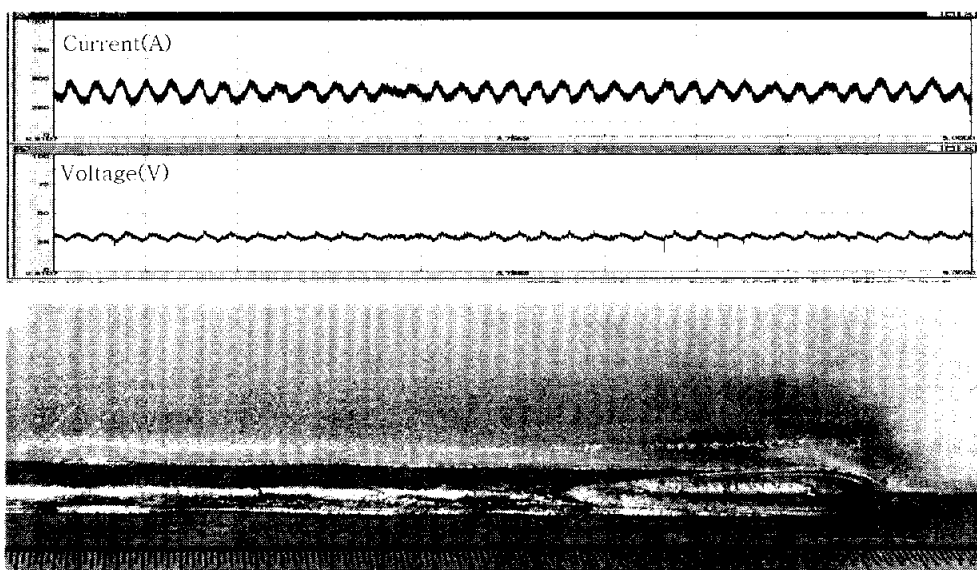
Waveforms and bead shape at welding current 390A
